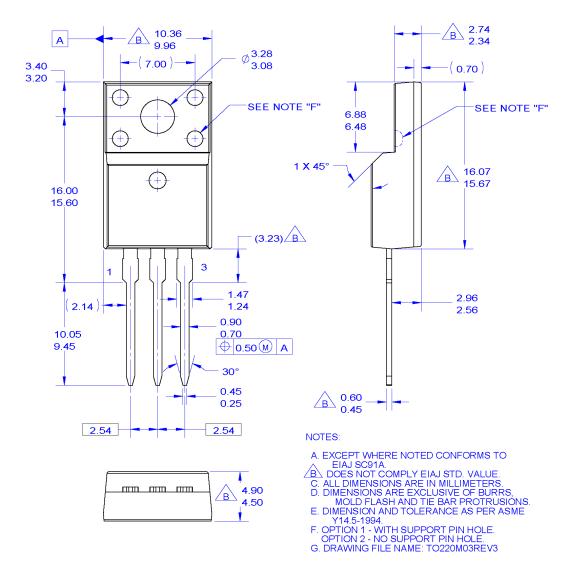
TO-220F 3L - TO220, MOLDED, 3LD, FULL PACK, EIAJ SC91, STRAIGHT LEAD
